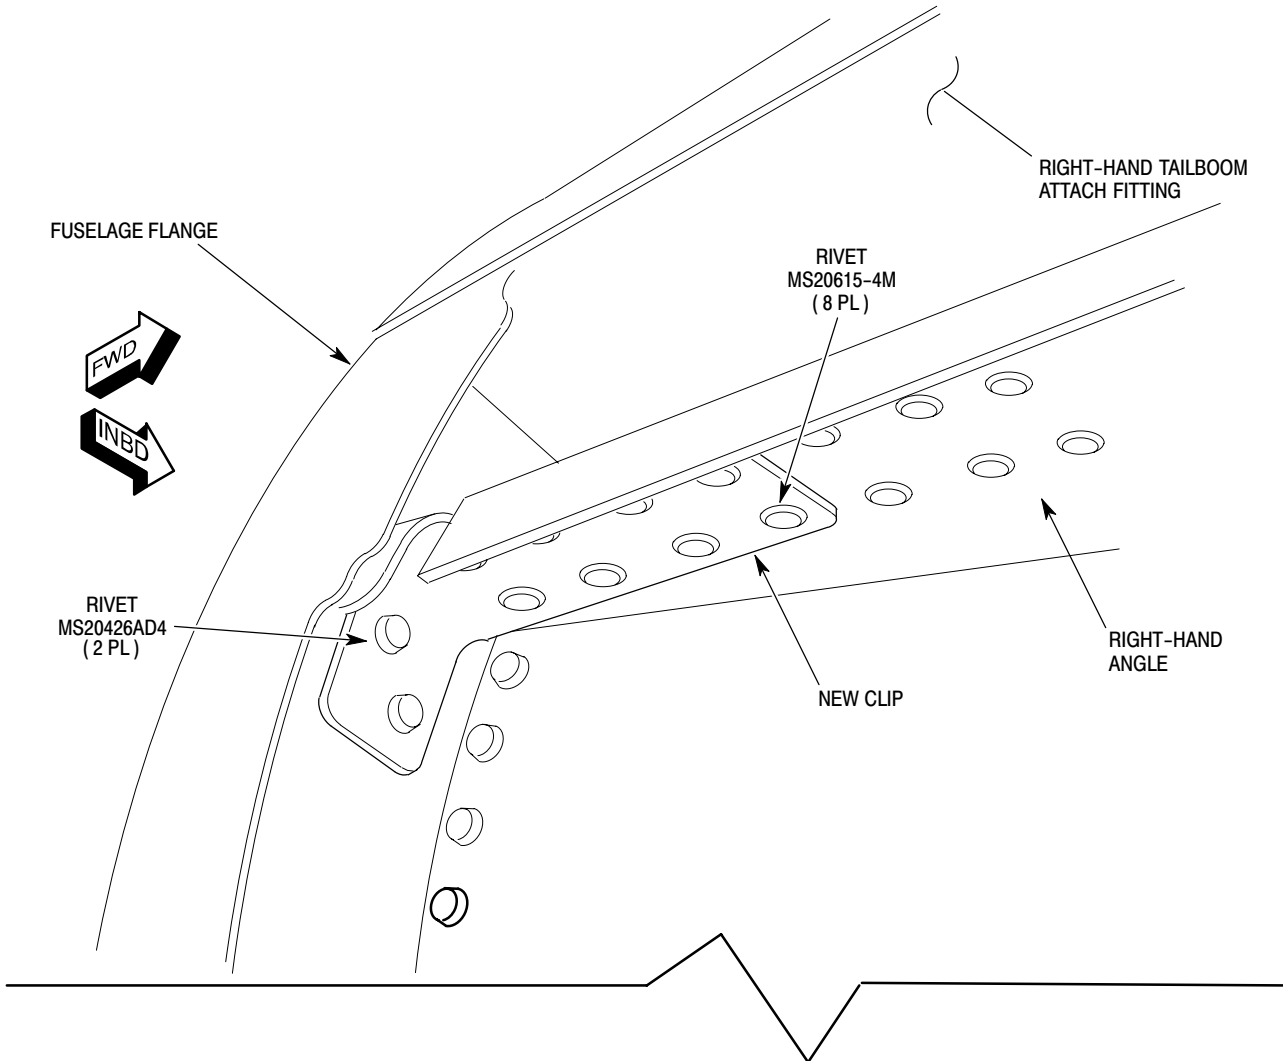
Tailboom Attach Fitting and Angle Inspection
